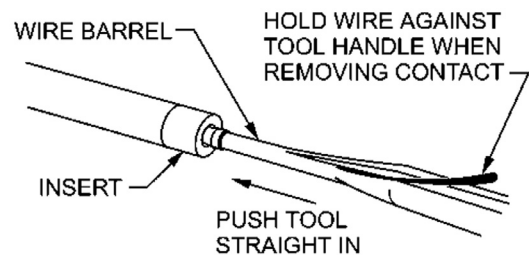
Contact Removal from Removable Contact Wire Splices
